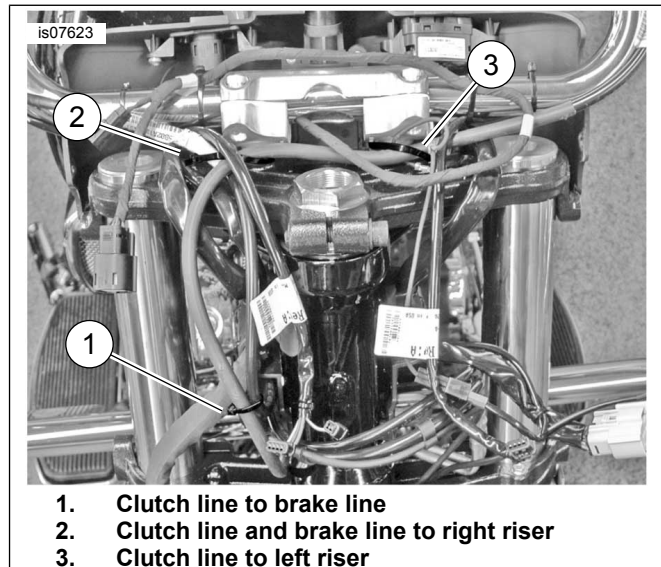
Clutch and Brake Fluid Lines, Fairing Models (Fairing Removed for Clarity)
